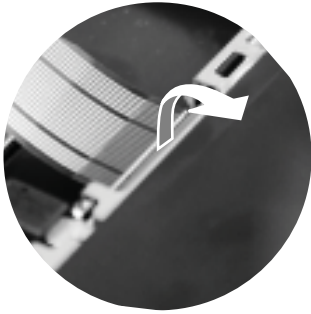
Remove the keyboard assembly (M830; 1 of 7)
